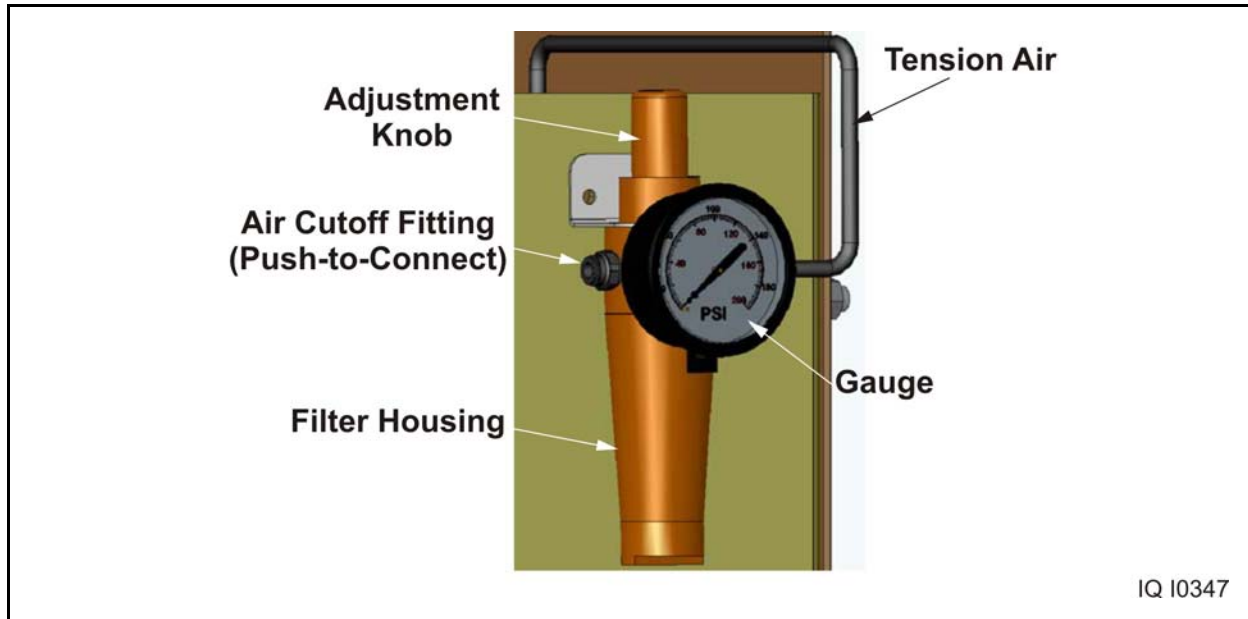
64 Belt Tensioner Filter/Regulator Assembly
